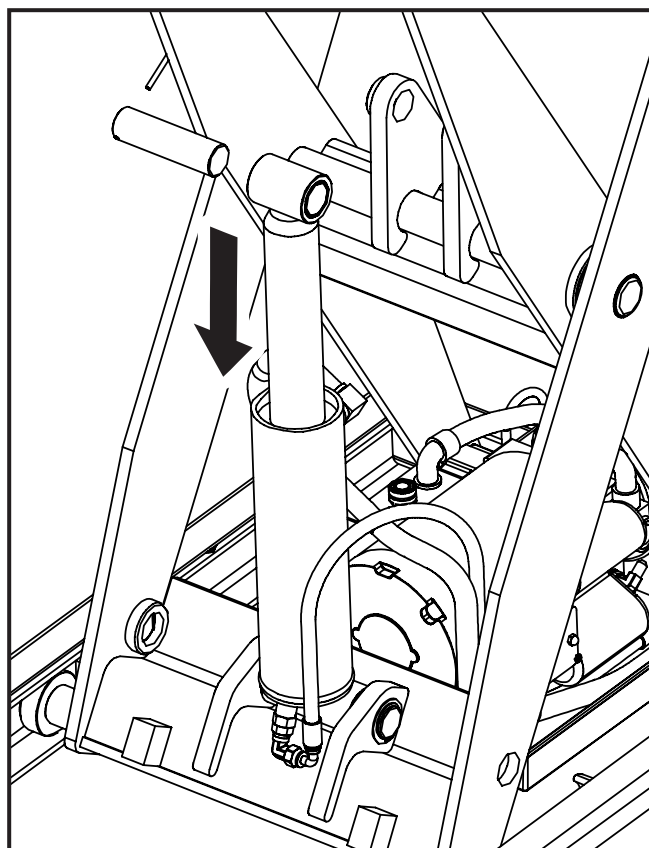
Cylinder Hydraulic Fluid Removal Detail
